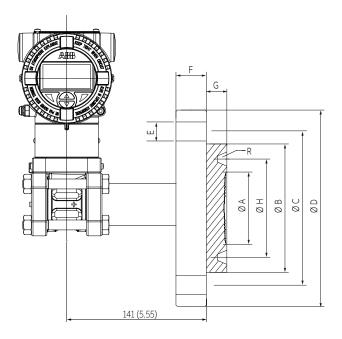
266HRH/266NRH with barrel housing and direct mount seal S26RA/S26RE/S26RJ flanged Raised Face extended diaphragm (For dimensions of S26 seals refer to the S26 datasheet)
